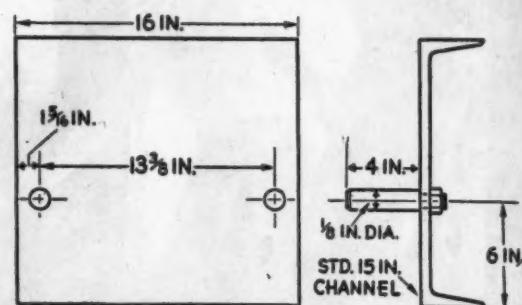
Drawing of another jig designed for checking and correcting alignment of the brake shoes. Use shown below
